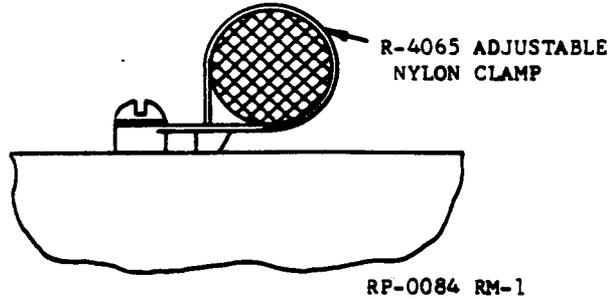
SECURING SEWED FORMS ON WOODWORK (PAR. 3.422)
